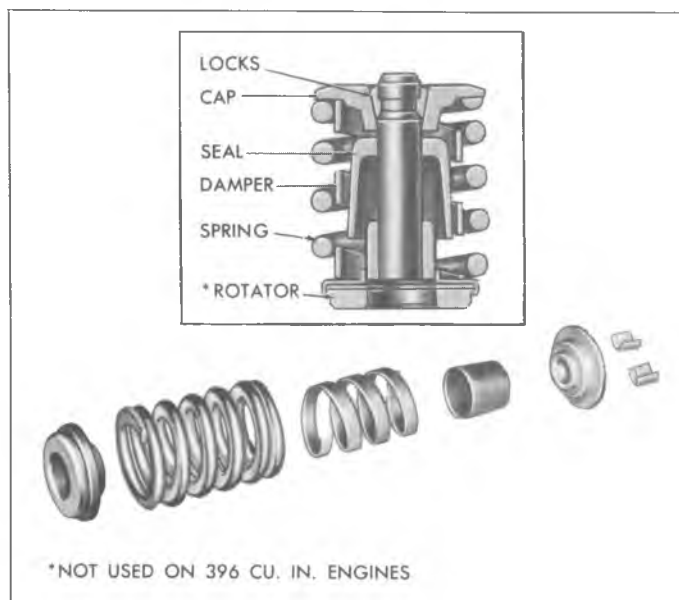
Valve Spring Installation (366, 396 and 427 V8)
